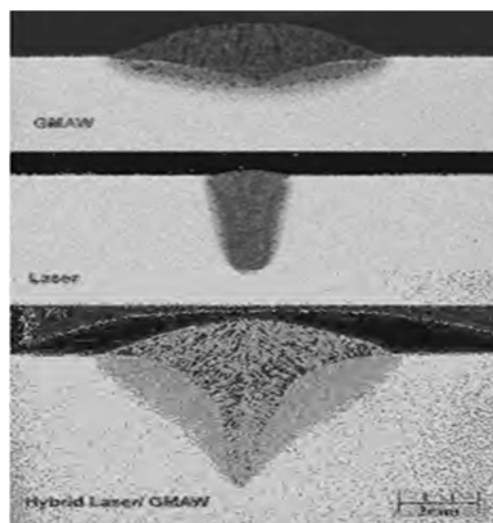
K-2: Hybrid laser welding combines the best features of laser beam and GMAW (top GMAW, middle LBW, bottom hybrid).
